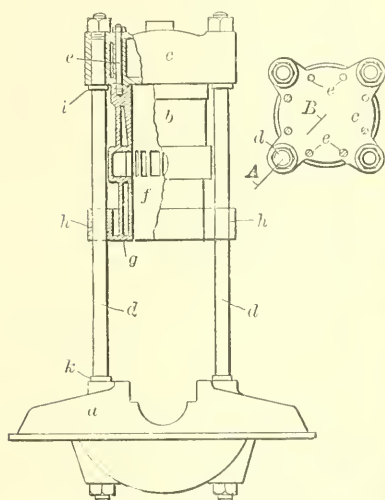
SECTIONAL DRAWING SHOWING CYLINDER OF 2000 H.P. (DESIGN BY SULZER BROTHERS)
